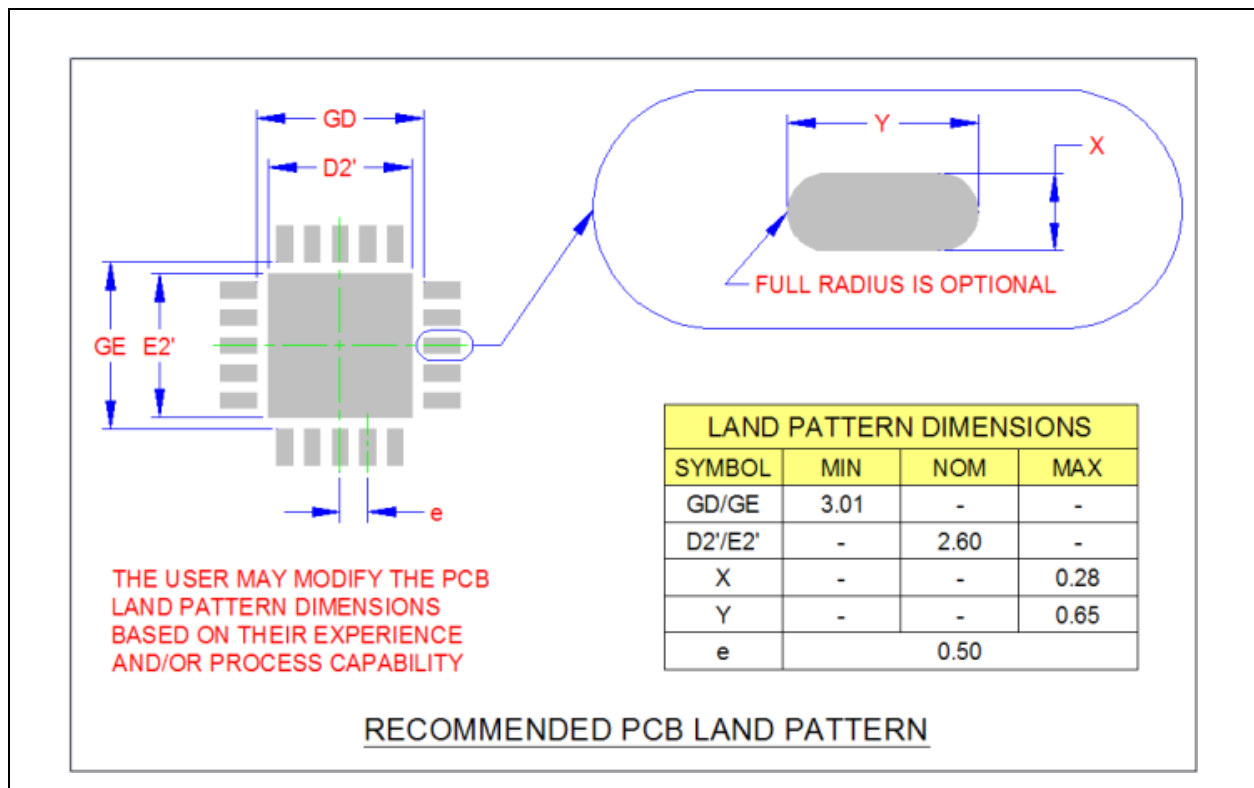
EMC2105 Recommended PCB Footprint Design for 20SQFN-4x4 Body
